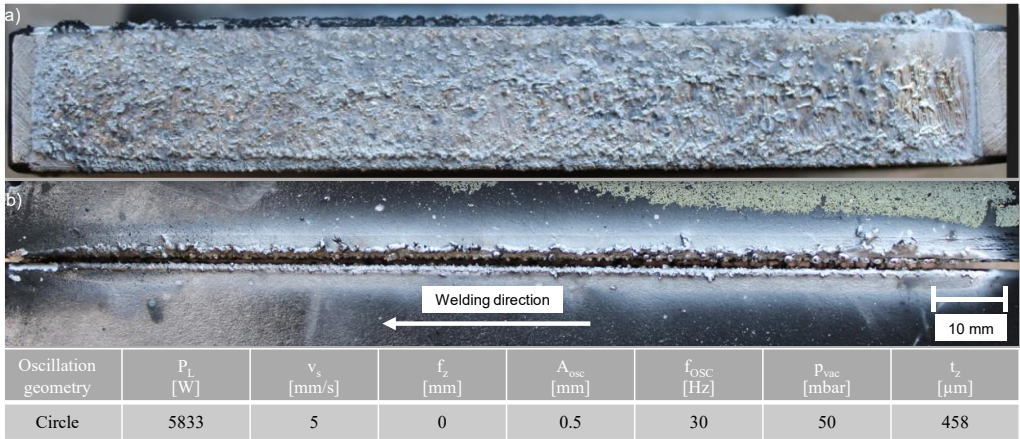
Welding parameters and (a) surface of the galvanized joint edge and milled edge preparation showing no structural bond after welding and (b) top view.
